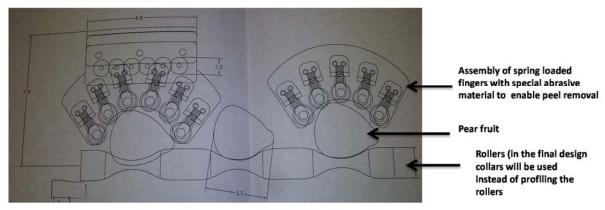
Peel removal section with and assembly of spring loaded fingers with special abrasive material to enable peel removal.
